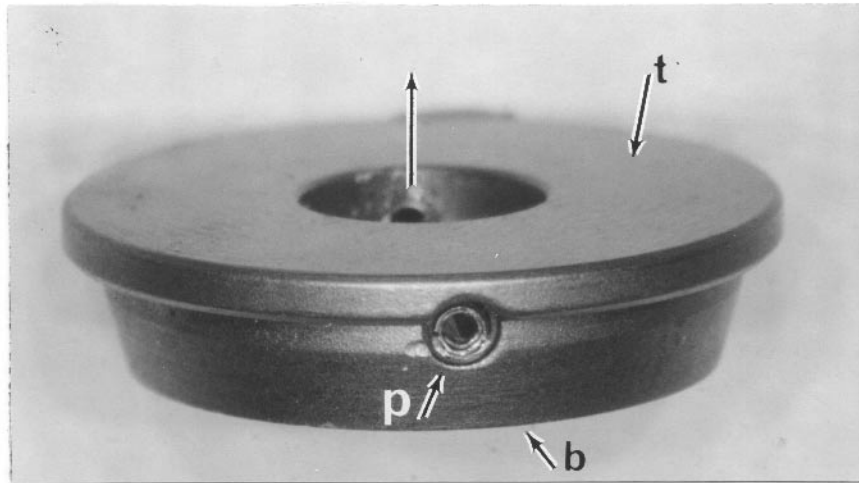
A close up view of the spring guide. The unlabeled arrow indicates the direction of deformation on the fracture surfaces of the separated pin. (5X).
